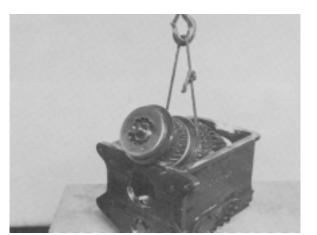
Using a hoist (if available) and a heavy rope, lift mainshaft assembly from transmission case. Mainshaft can be removed by hand, but is quite difficult to handle.
